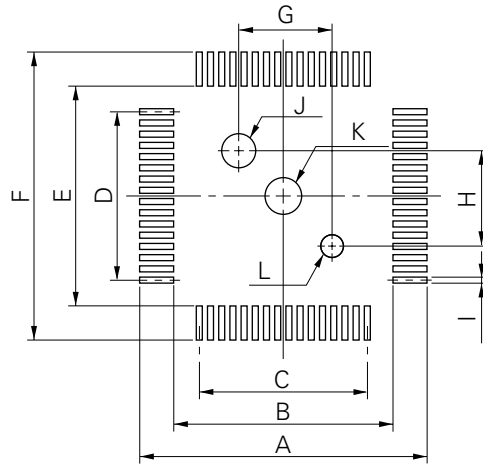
Socket Drawing of EV-9200GC-64 (Reference)
